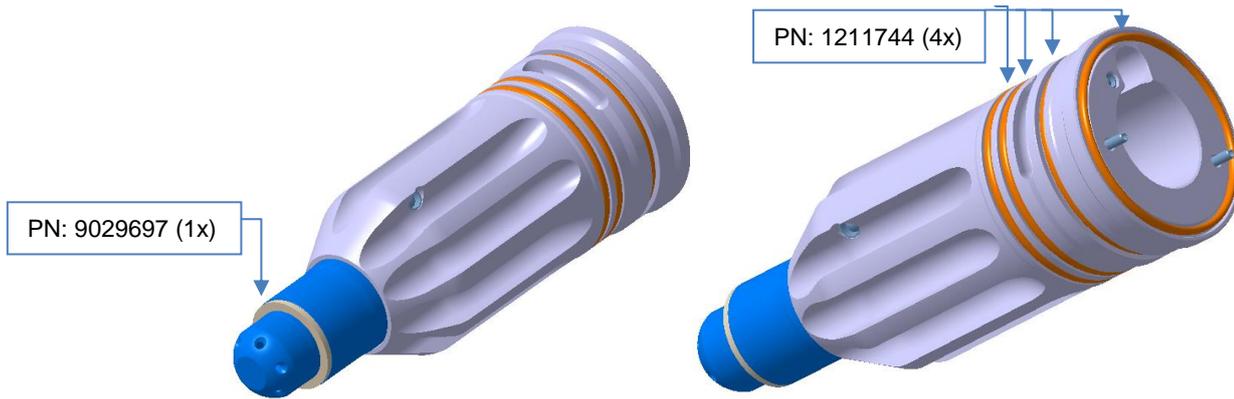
Prechamber & spark-plug sleeve assembly with O-rings and metal gasket
